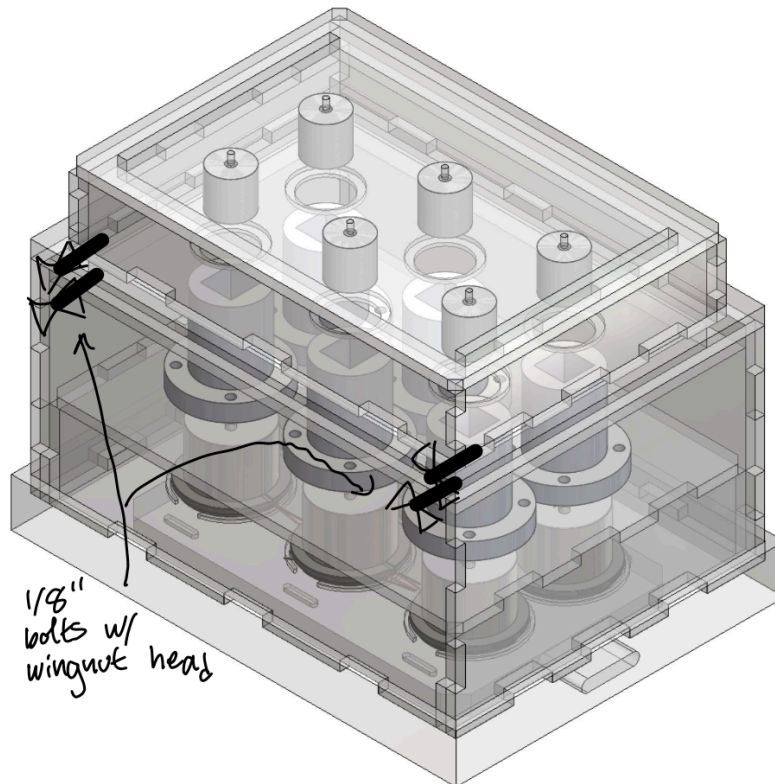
A schematic bioreactor with one face of wingnut attachment shown.
